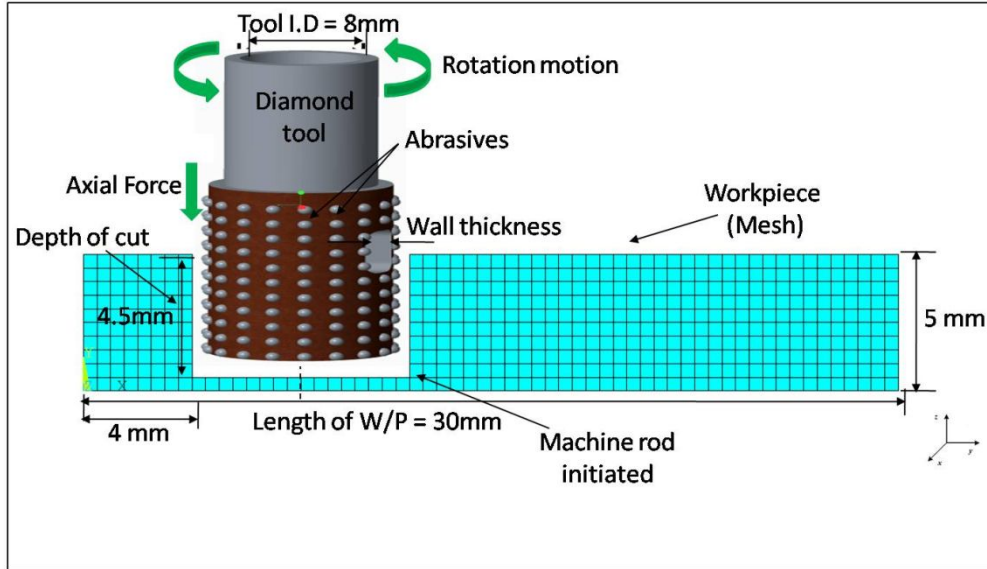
Initial state of the simulation model of the workpiece with hollow abrasive coated tool
